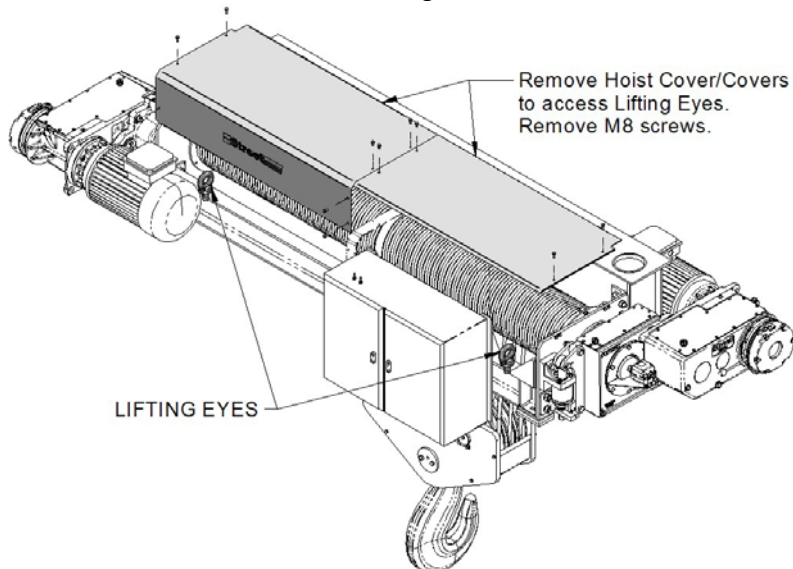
Removing Hoist Cover/Covers on 4, 8 & 12 fall Foot Mount and Double Girder Crabs
